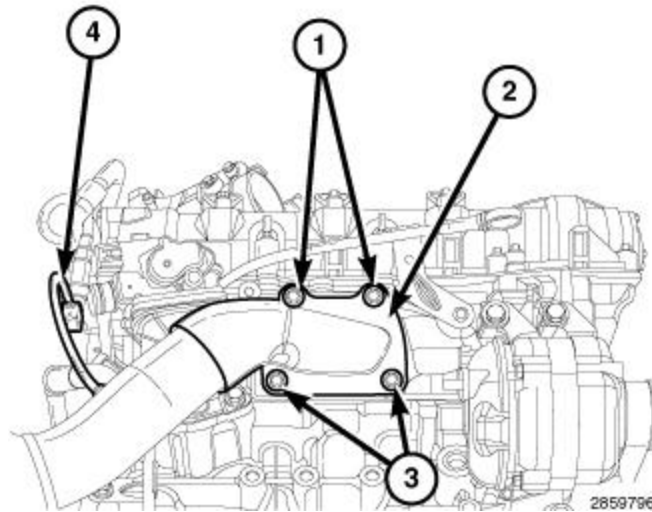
Right Upstream Oxygen Electrical Sensor Connector, Down Pipe Flanges & Bolts
